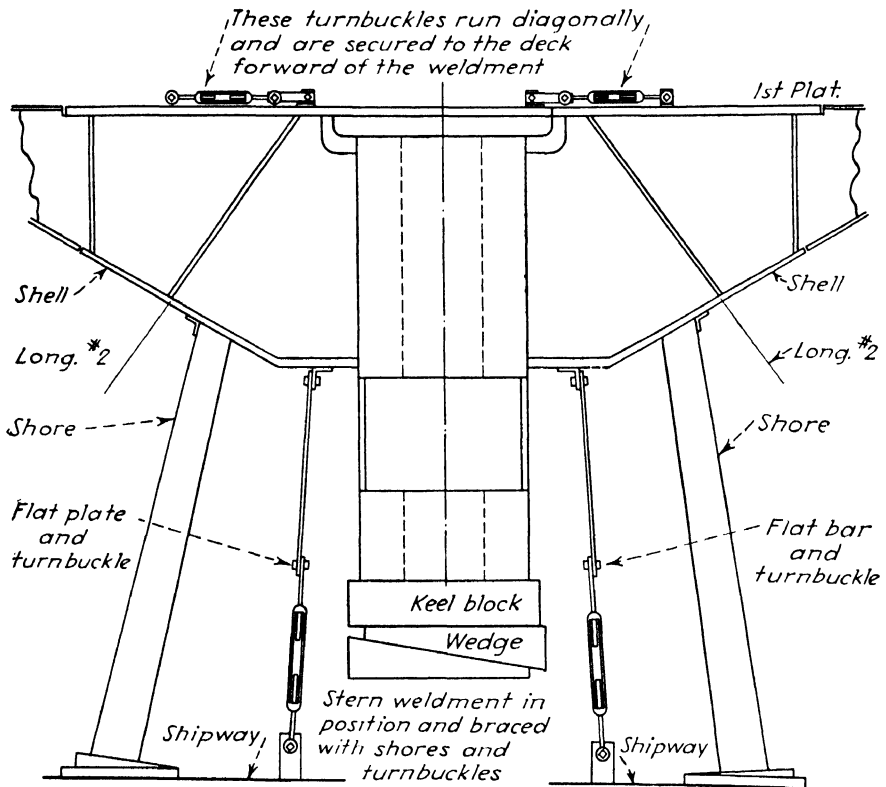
Stern weldment in position and braced with turnbuckles and shores.
